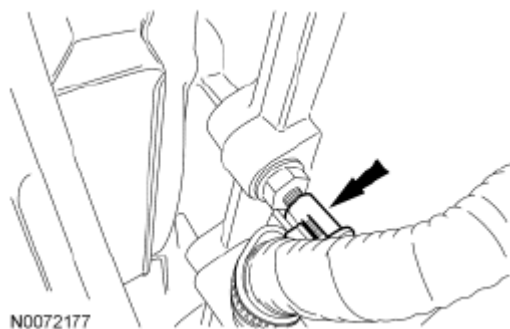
Locating Wiring Harness Retainer On Transaxle Stud Bolt
